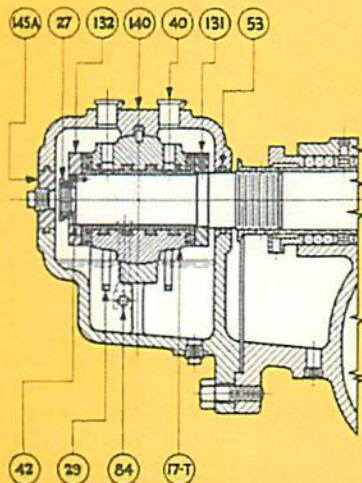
SLEEVE BEARING WITH THRUST COLLAR.
